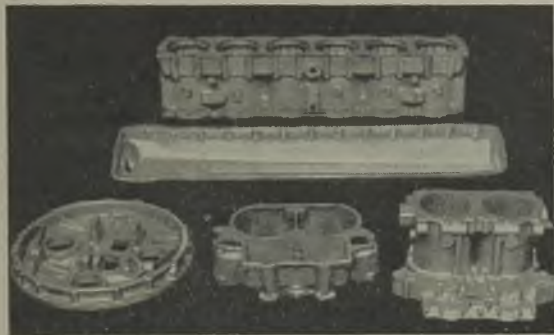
REPRESENTATIVE GROUP OF GRAVITY DIE-CASTINGS FOR ROLLS-ROYCE MERLIN ENGINE.
